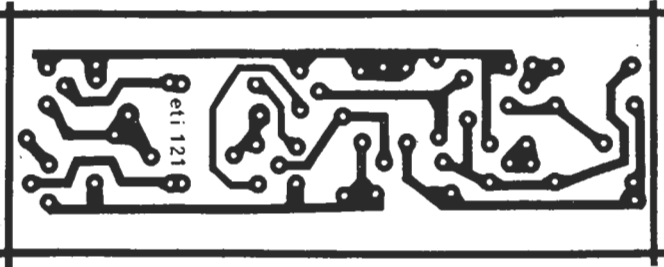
Printed circuit board for the pulser. Full size 23 x 65mm, or 23 x 85mm. If this board is made to 23 x 85mm (same scale as shown here) it will not fit into a solder tube case. In this case the board should be reduced to 65mm in length (as shown below). To save confusion when ordering the board ask for ET1121-85 or ET1121-65.
